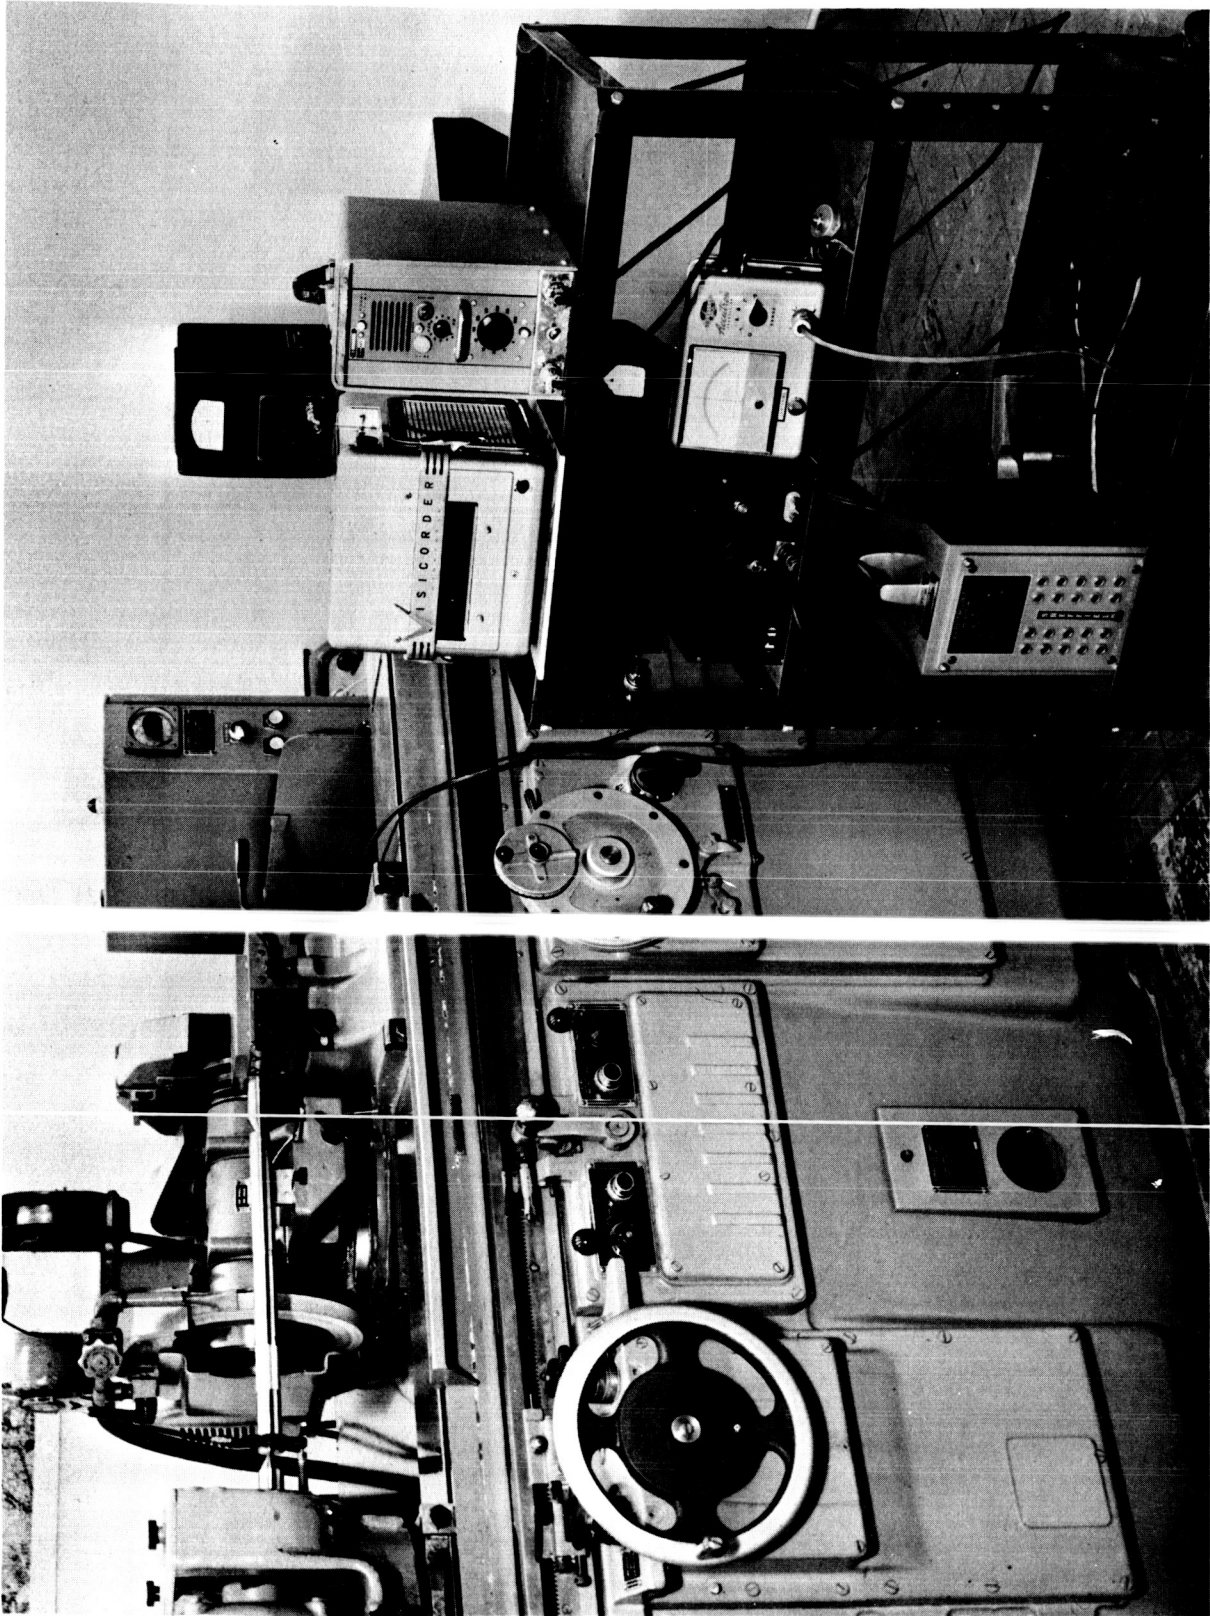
View of Gri der Used in Shaft Runout Measurements.
